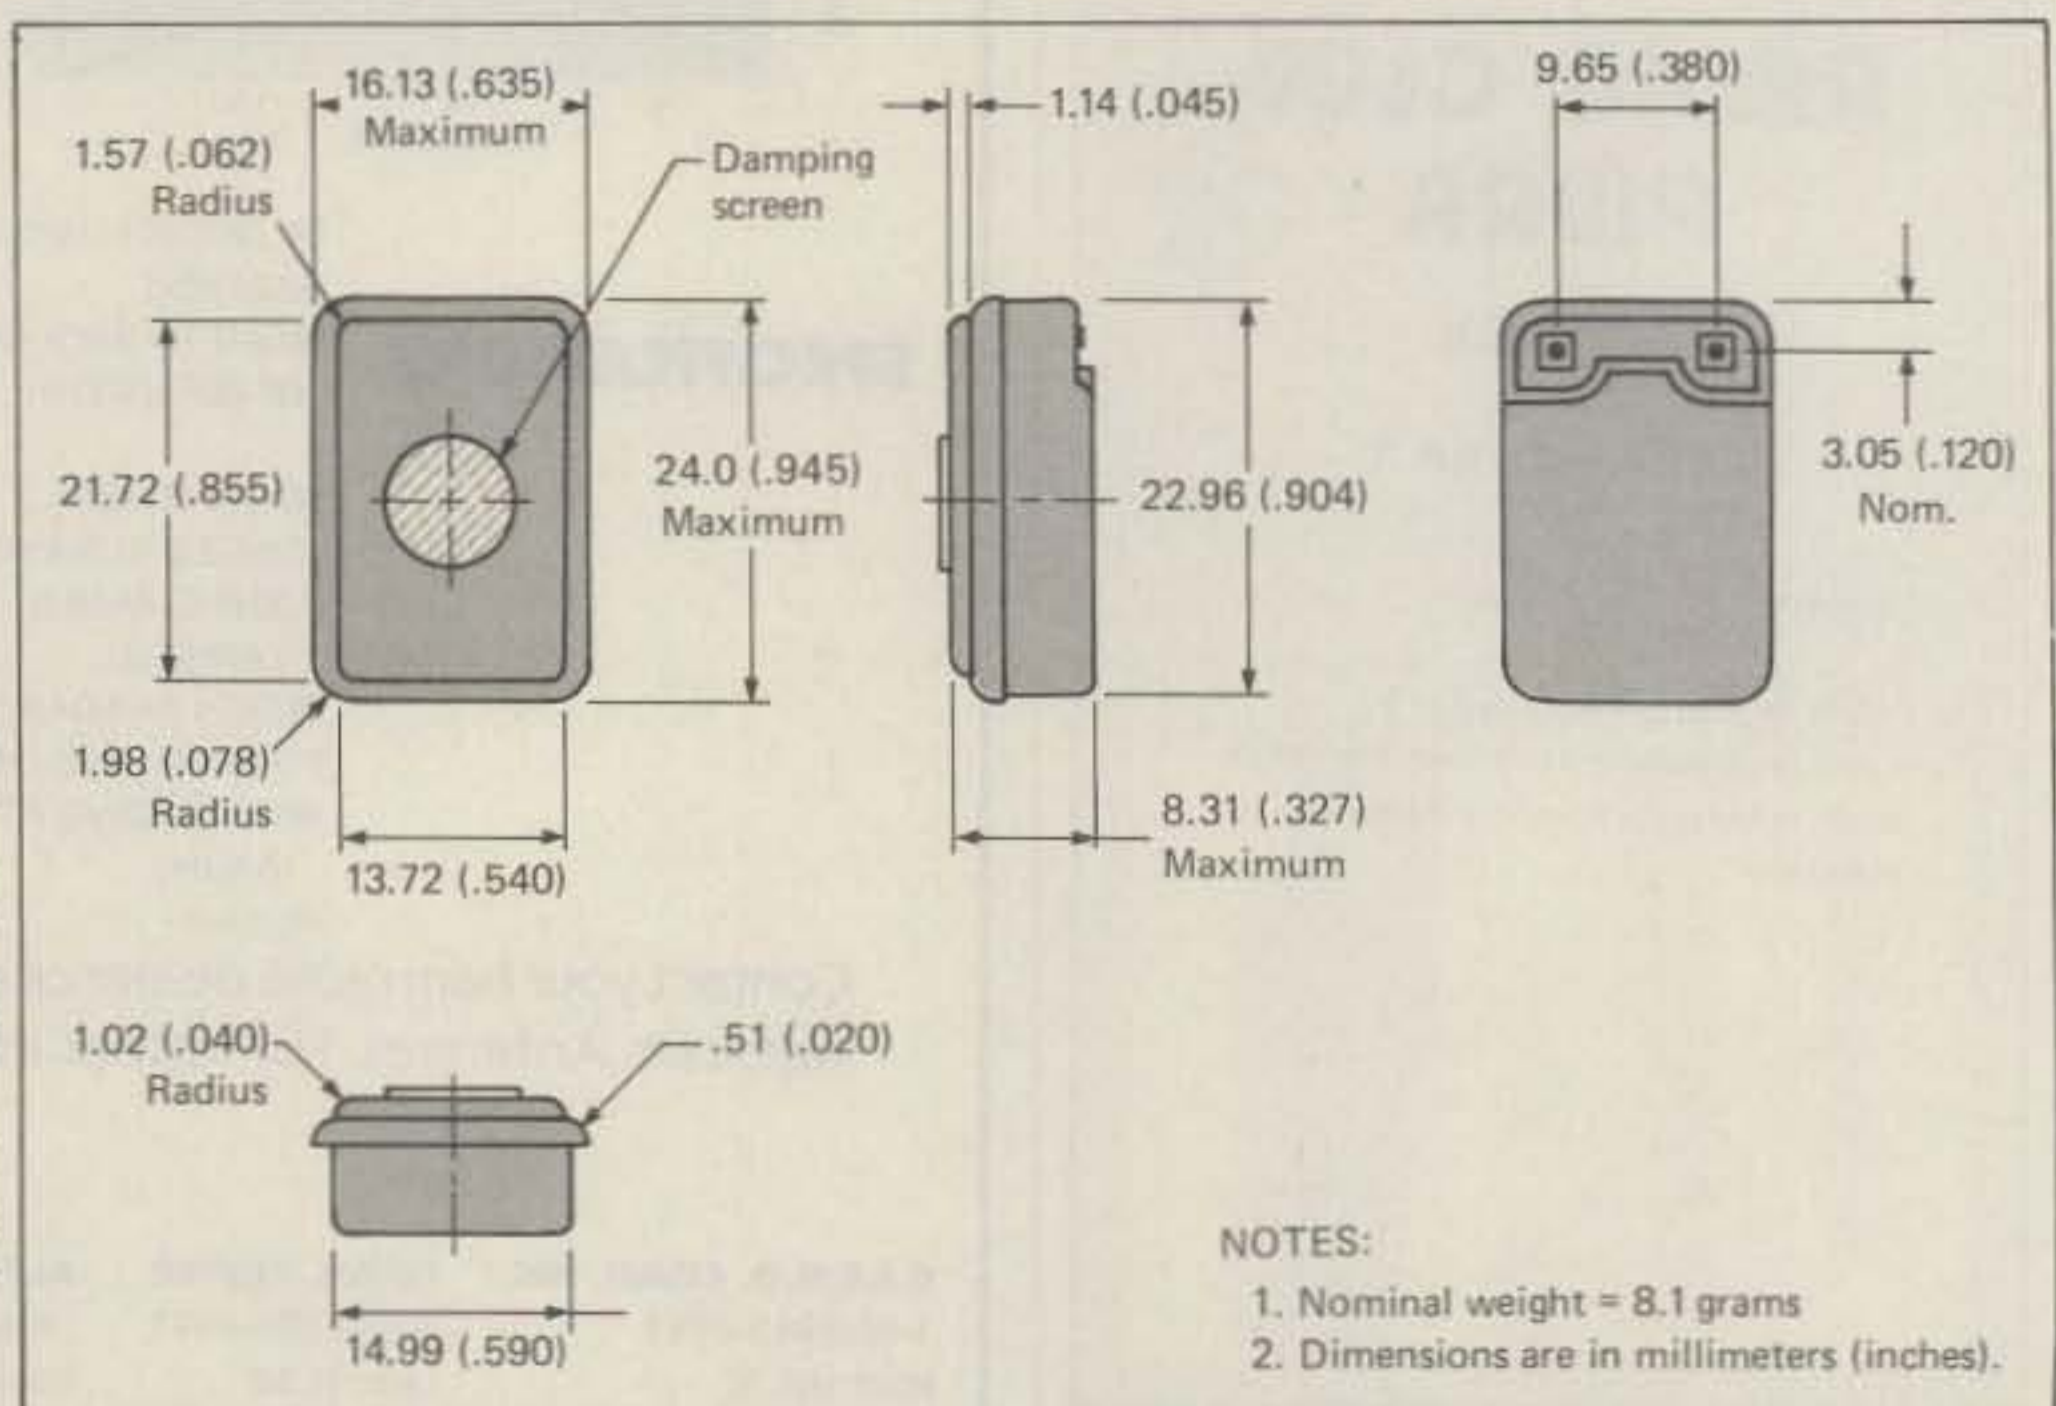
Physical dimensions, in millimeters (inches), of the HC-3 cartridge.
